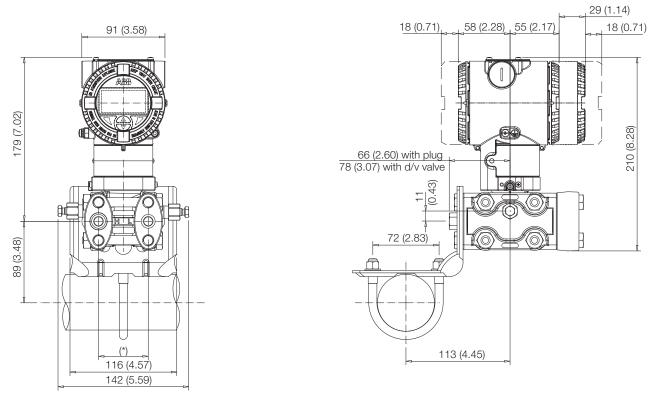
Differential Pressure Style transmitter with barrel housing installed on a horizontal pipe with optional bracket (B2)
